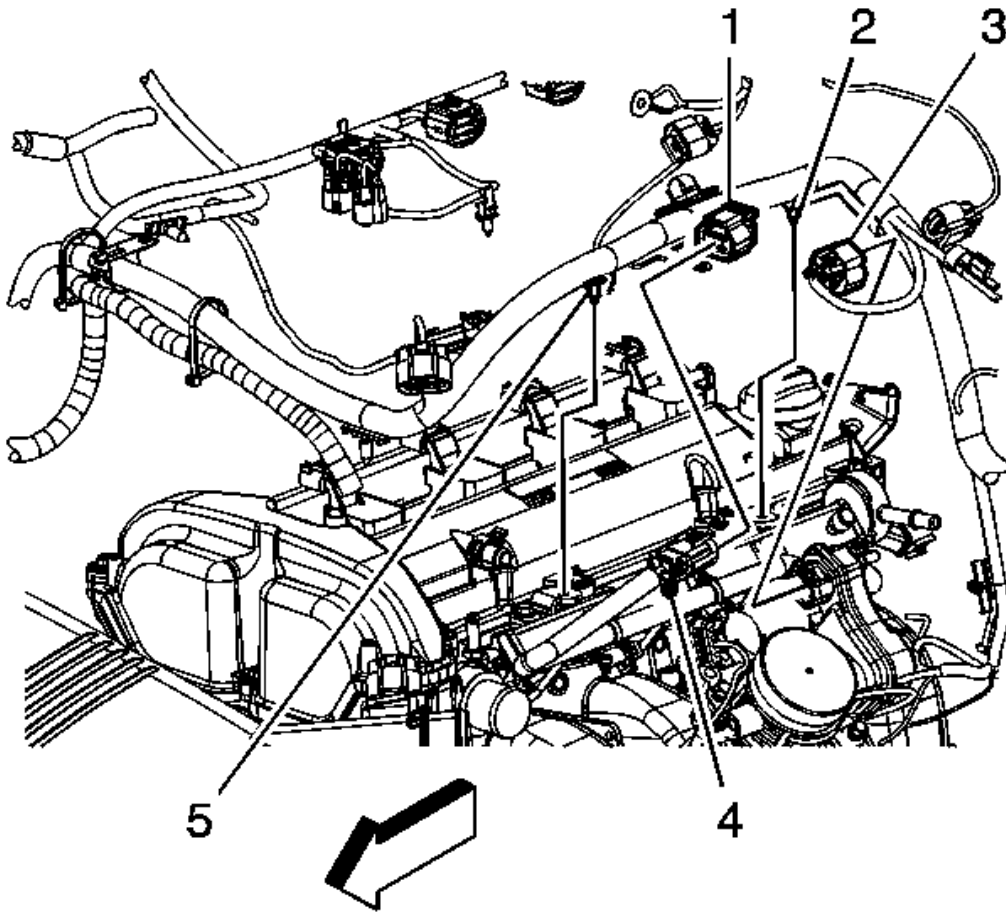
View Of Fuel System Electrical Connectors & Harness Clips
